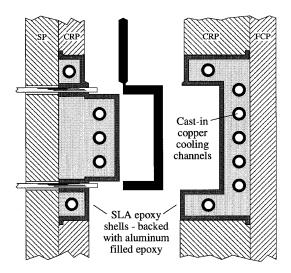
Mold cavity/core insert set constructed with a thin, SLA epoxy shell, backed up with an aluminum or copper filled (epoxy) casting resin. The backing material contains "cast in place" copper or lost wax cooling channels.
